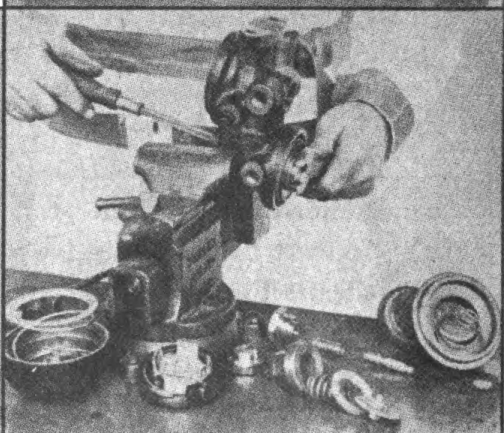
RELAY—EMERGENCY VALVE—REMOVING DIAPHRAGM COVER BODY
